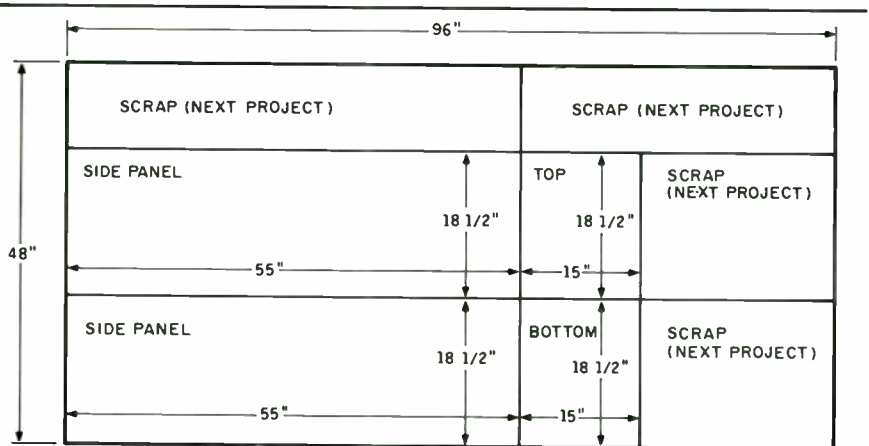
Cutting guide for 4 by 8' sheet of 3/4" oak plywood (all dimensions in inches).
